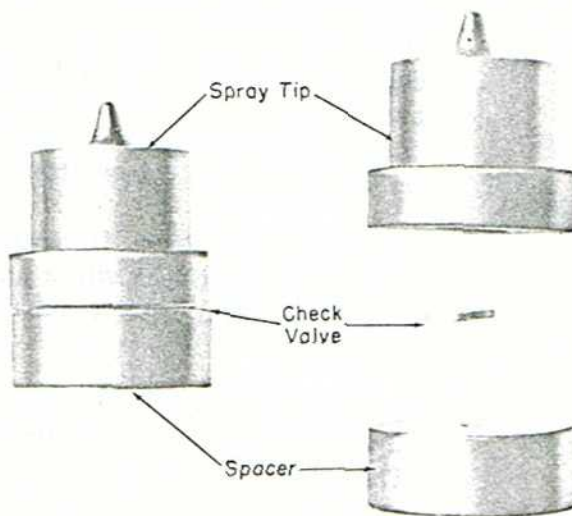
Flat Valve, Spray Tip And Spacer Sub-Assembly
